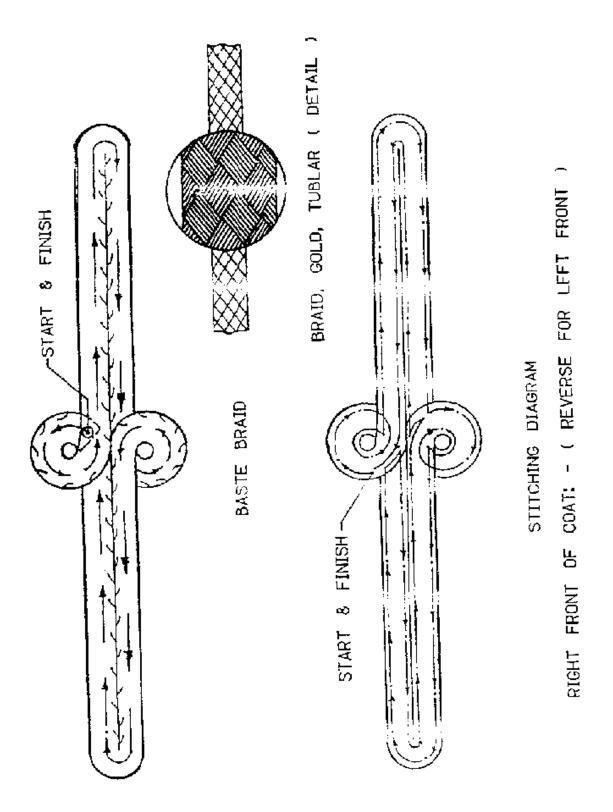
Coat, Man's - Summer and Winter, Scarlet, Drum and Bugle Corps, Drum Major and Director
